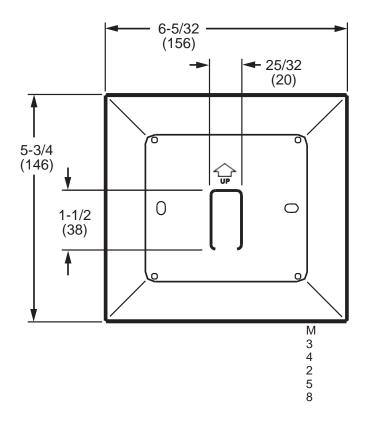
Dimensions of VisionPRO cover plate in in. (mm).
